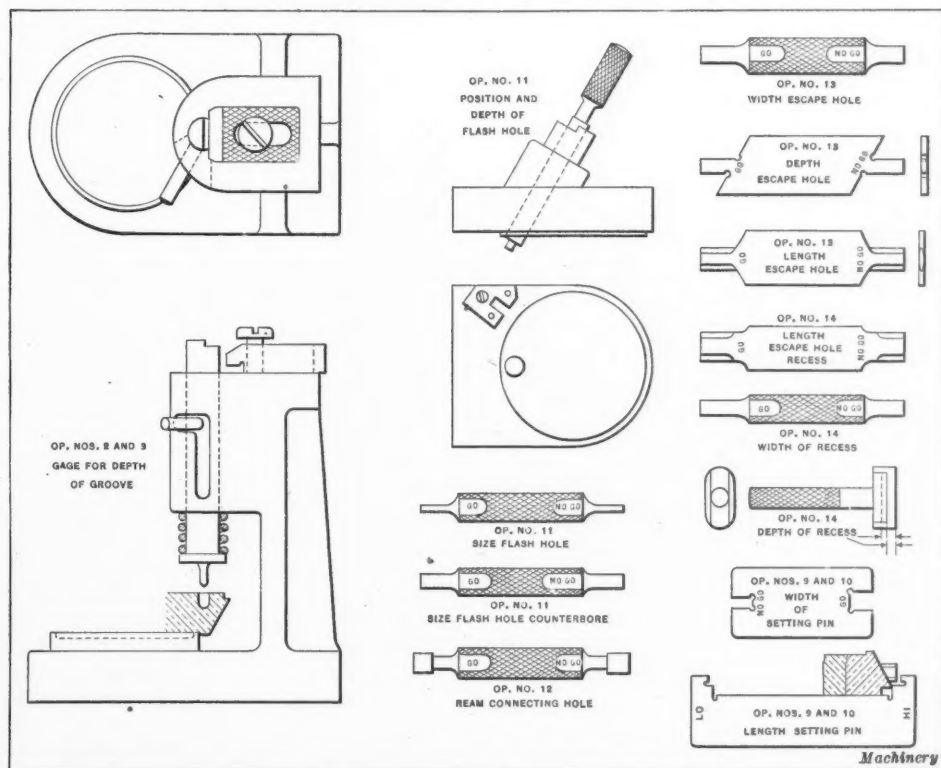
Other Examples of Gages used in manufacturing Fuse Parts
